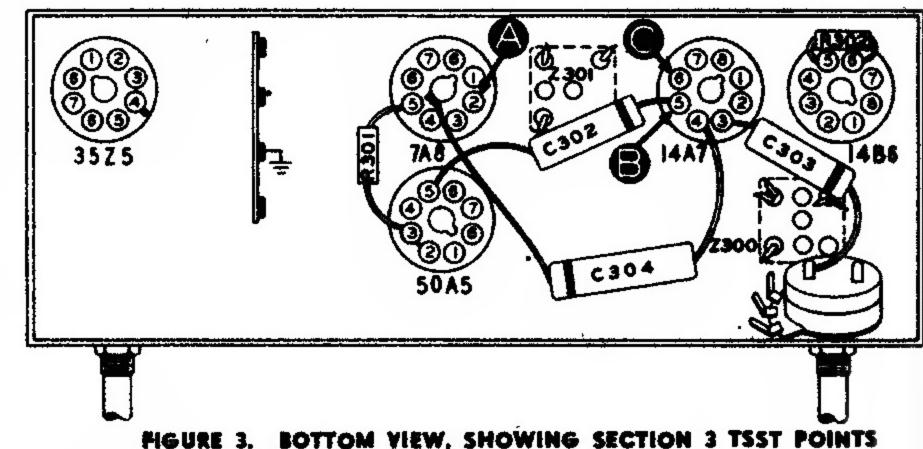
BOTTOM VIEW, SHOWING SECTION 3 TSST POINTS
